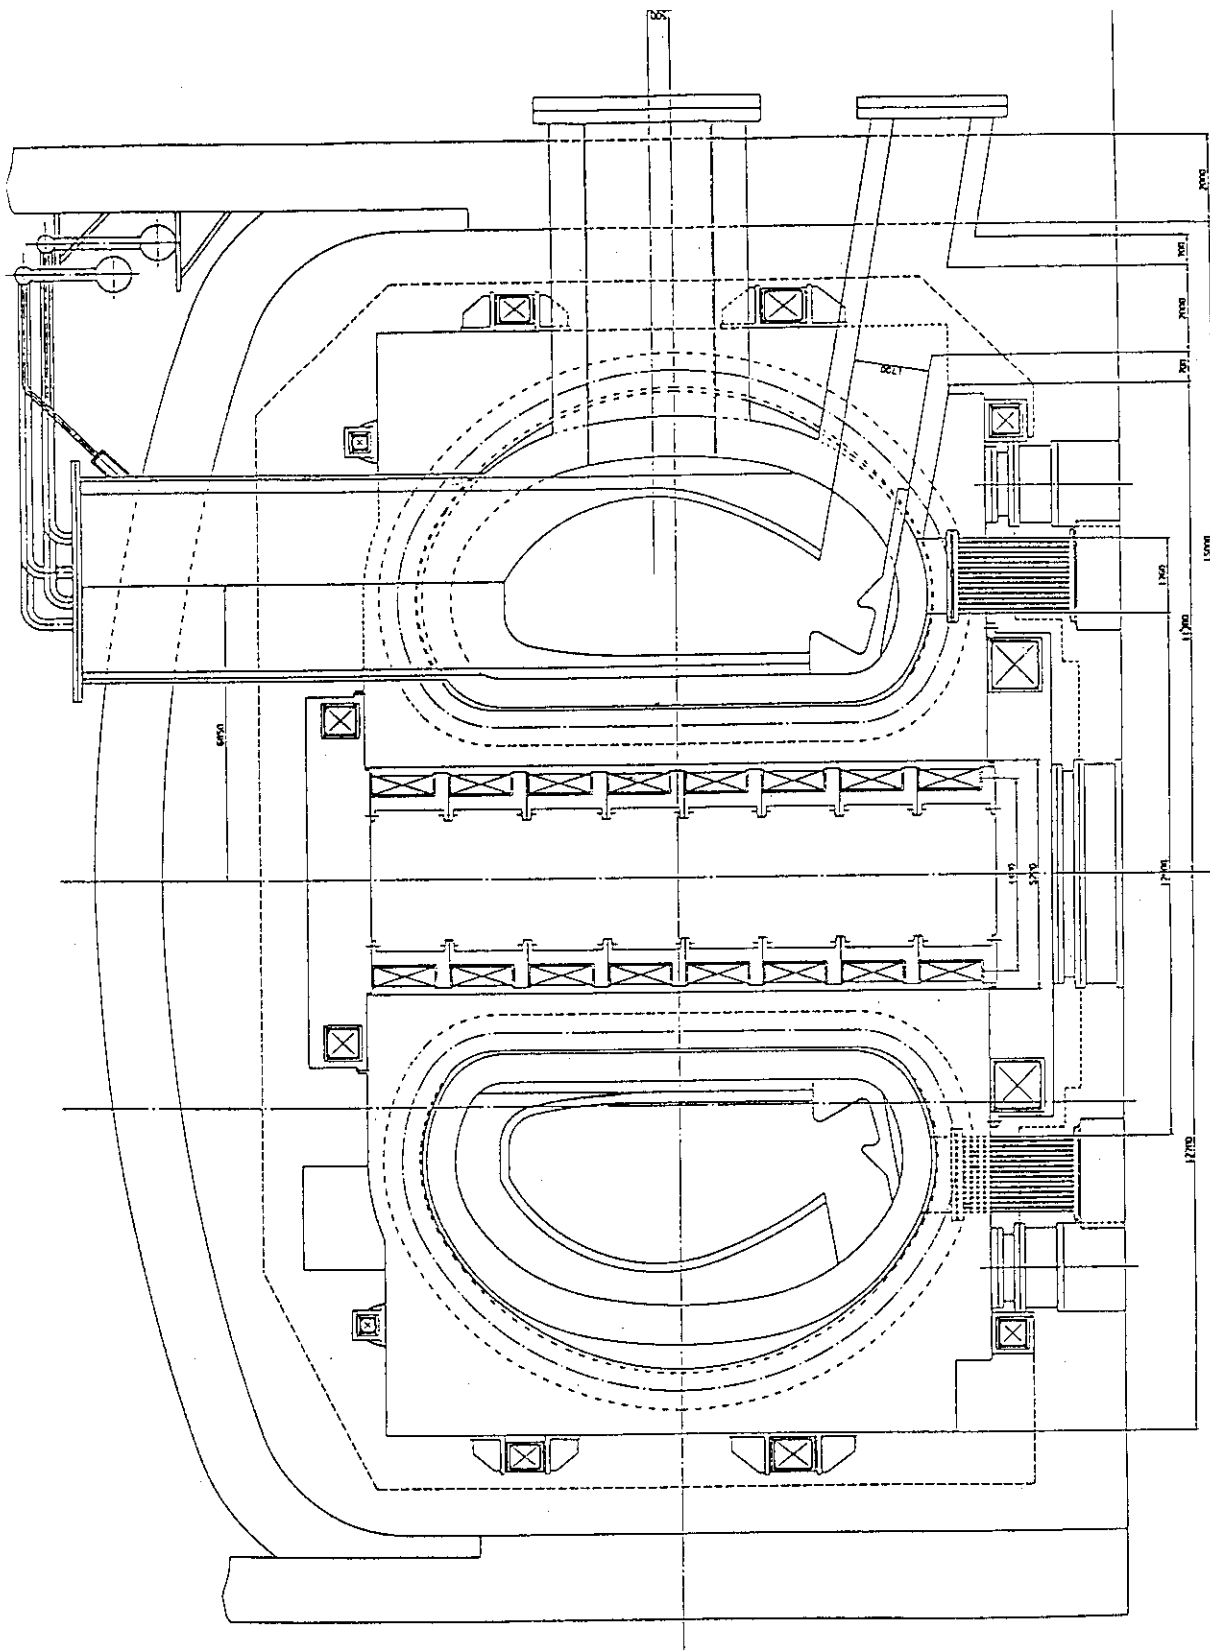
(10) Initial assembly scheme of SSIR (10).
